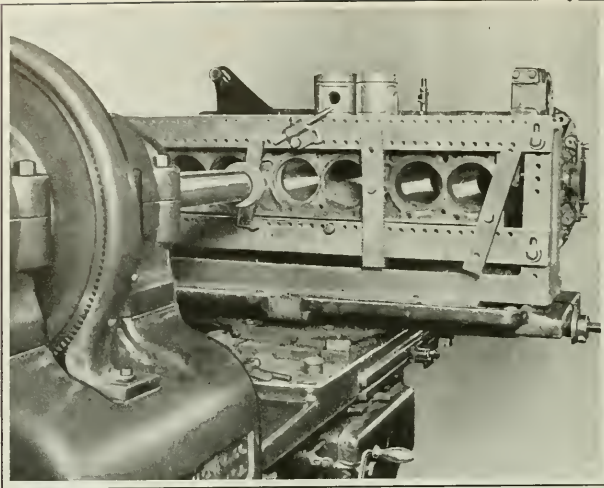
Cylinder Grinder set up for regrinding the Bores of a Six-cylinder Marmon Sleeve-valve Engine
